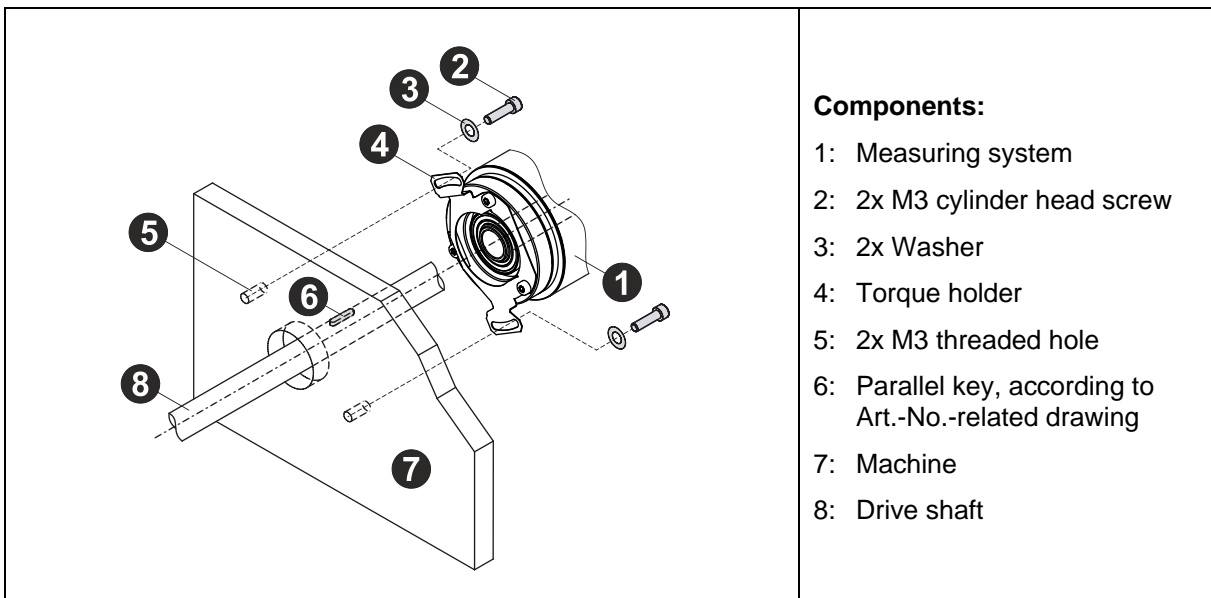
Mounting with torque holder (Spring metal sheet with two wings), principle illustration
